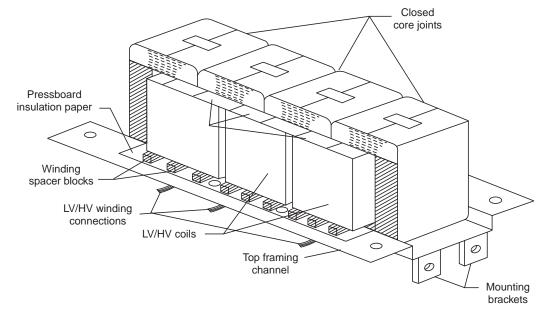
AMDT core/coil assembly (core joints closed, LV/HV coils installed)
